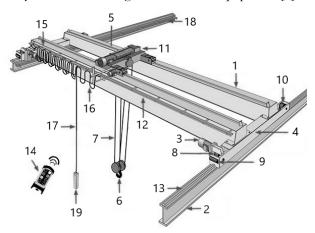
Double girder bridge crane: 1 – bridge girder, 2 – runway beam, 3 – bridge drive, 4 – end truck, 5 – hoist, 6 – hook block, 7 – wire rope, 8 – bridge drive wheel, 9 – end truck bumper, 10 – bridge idler wheel. 11 – trolley frame, 12 – pendant / conductor track, 13 – runway rail, 14 – radio control, 15 – panel, 16 – trolley festoon, 17 – pendant cable, 18 – downshop conductors, 19 – pendant
